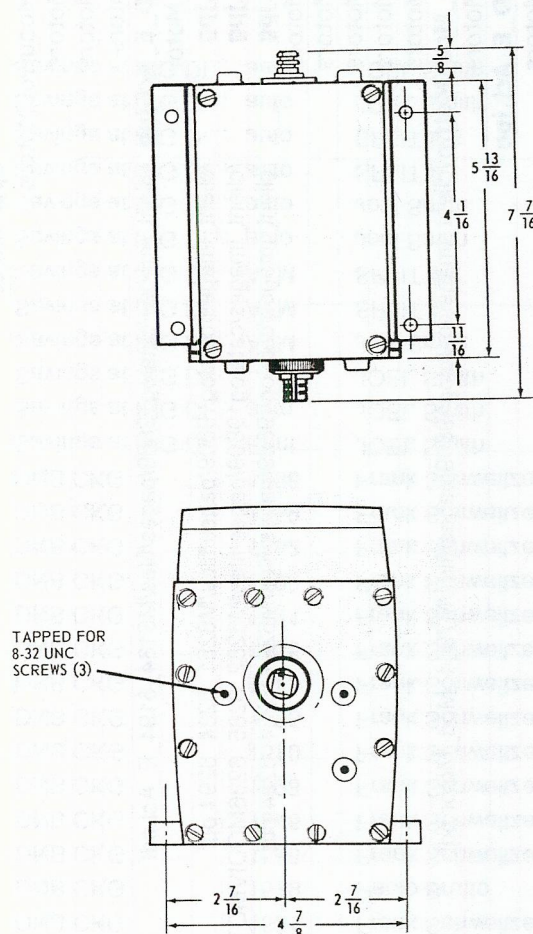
M644 and M944 Modutrol Motor with dimensions in inches.
